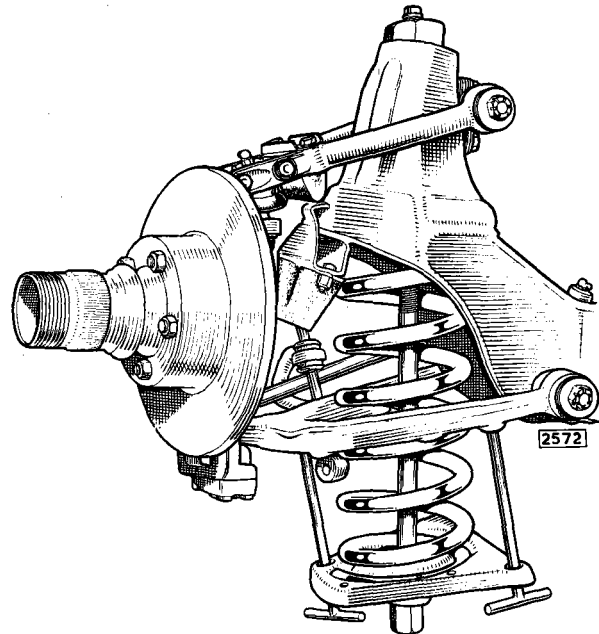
Refitting the coil spring with a compressor ; the pilot studs facilitate alignment of the seat pan securing bolt holes.
